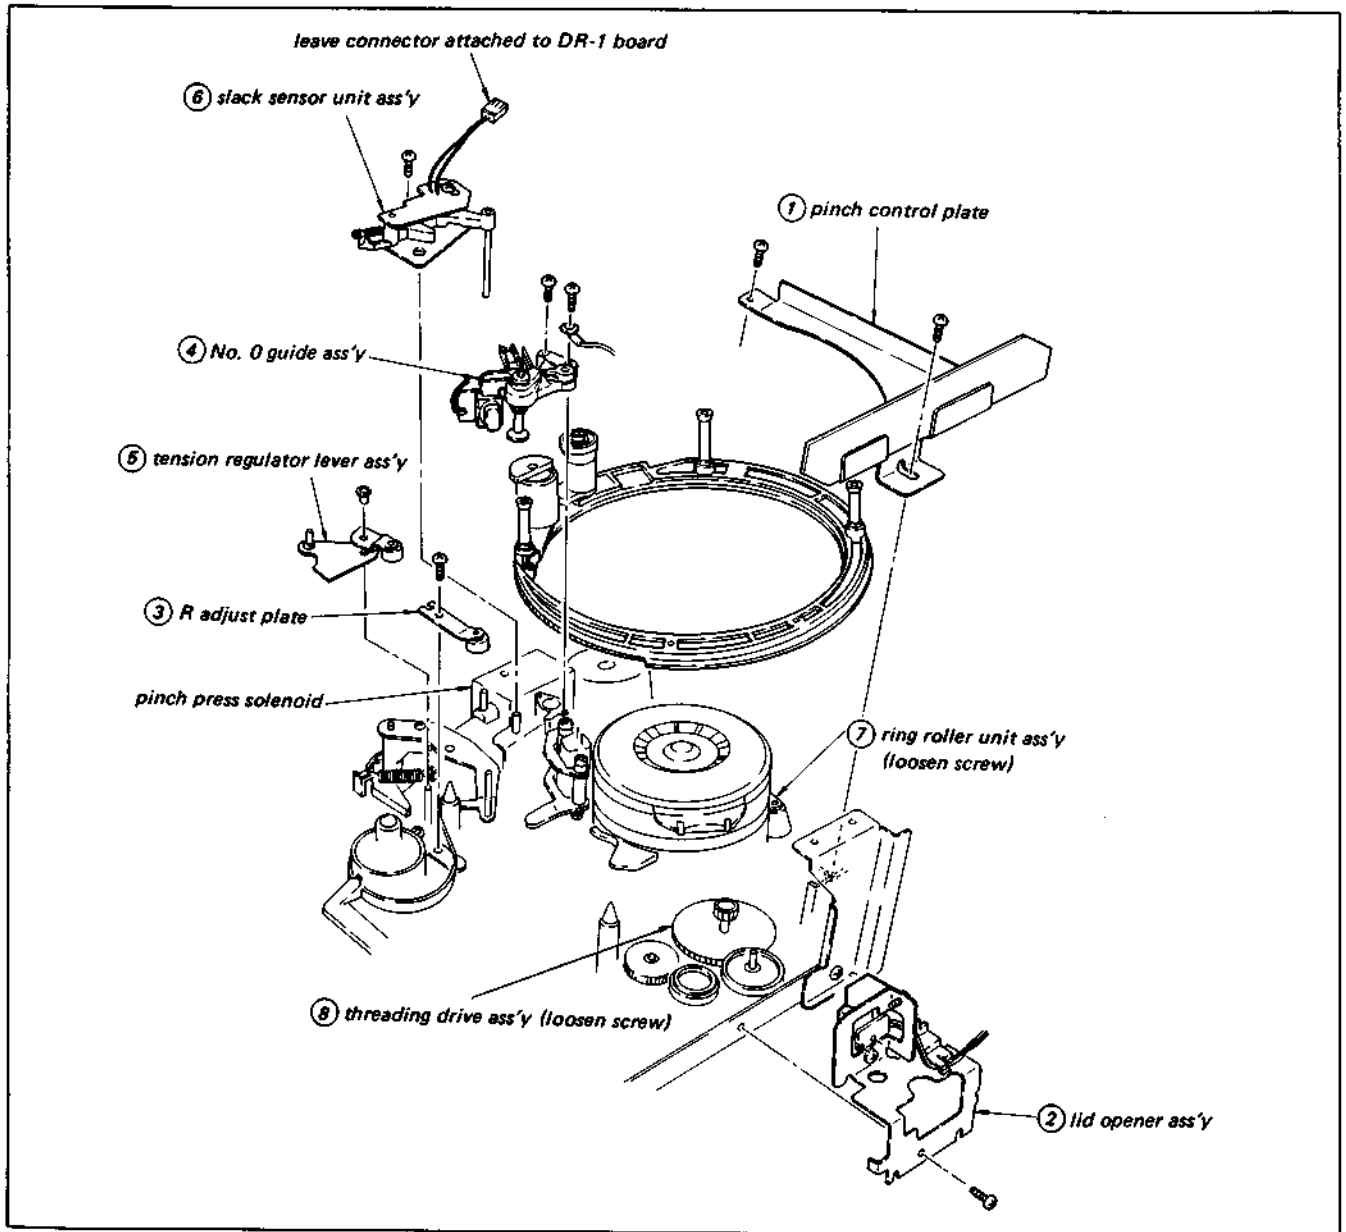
Replacement and adjustment of threading ring ass'y
